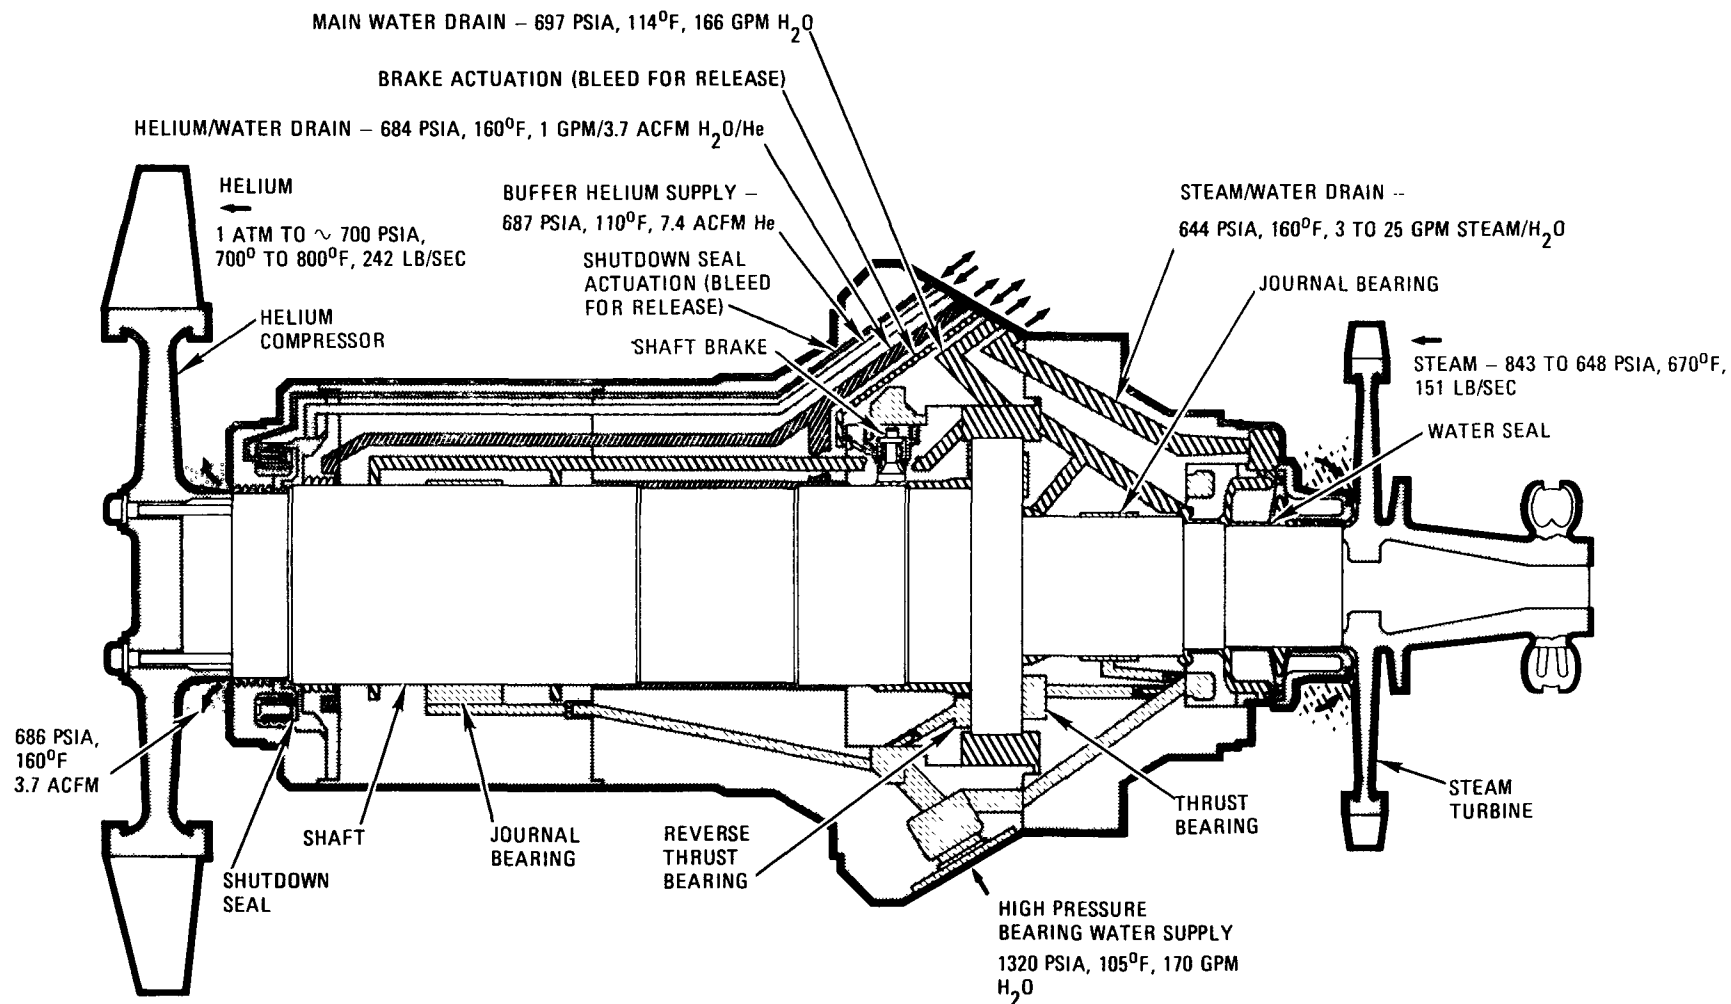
Fort St. Vrain helium circulator bearing and seal flow arrangement
